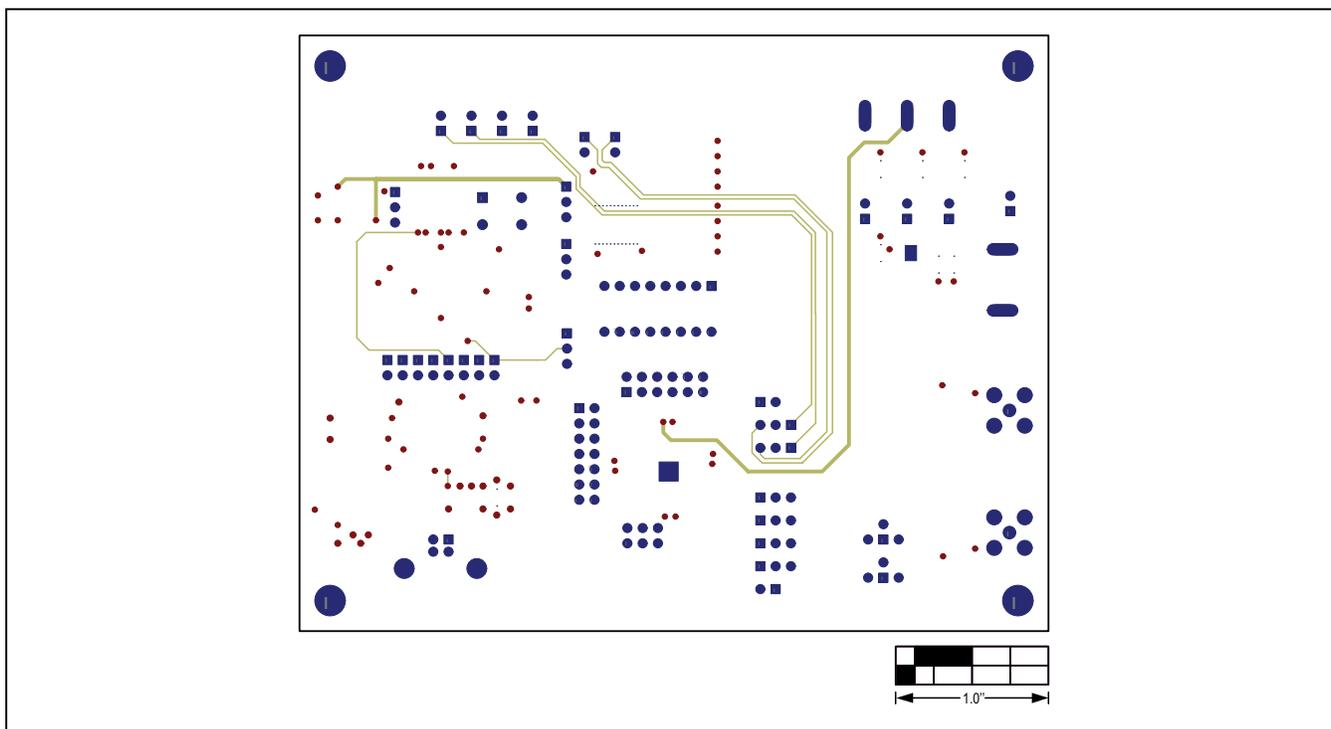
MAX9271 Coax EV Kit PCB Layout—Solder Side
